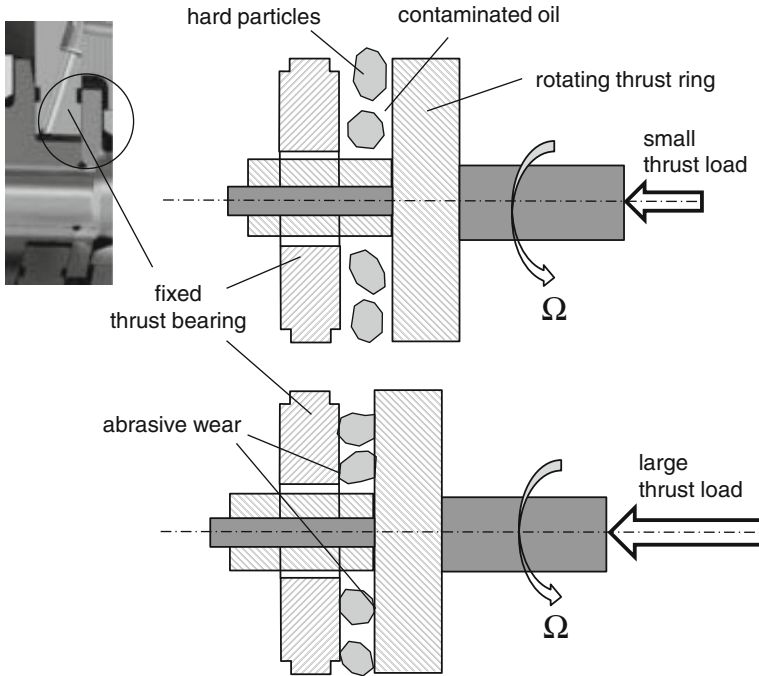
Abrasive wear mechanism in a thrust bearing
